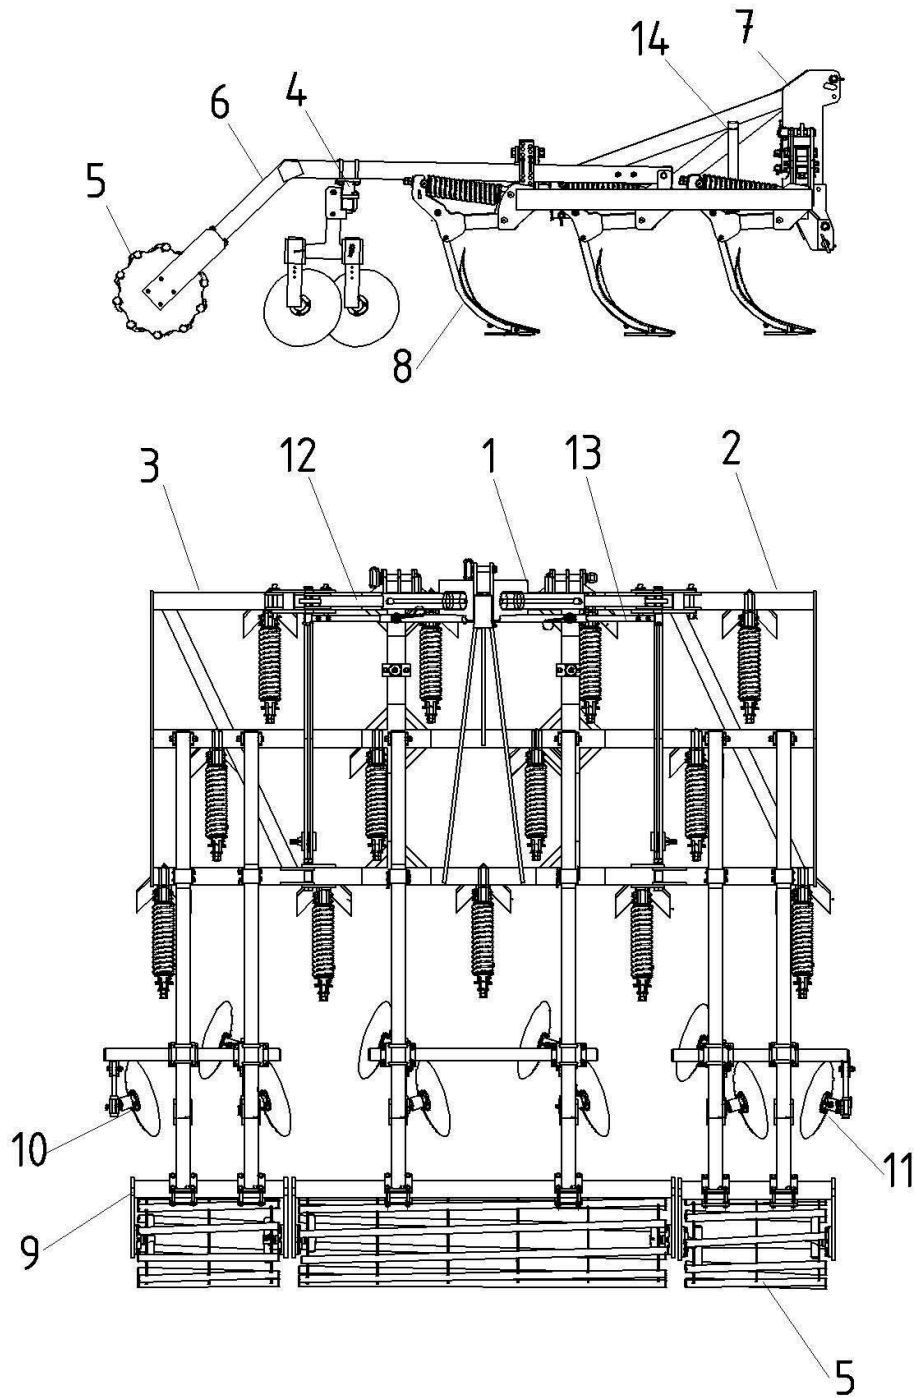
TOP unit design: 1 – frame, 2 – right side frame, 3 – left side frame, 4 – disc beam, 5 – shaft, 6 – shaft arm, 7 – drawbar, 8 – working component, 9 – shaft clamp, 10 – right disc, 11 – left disc, 12 – cylinder, 13 – hydraulics mechanical lock, 14 – bumper
